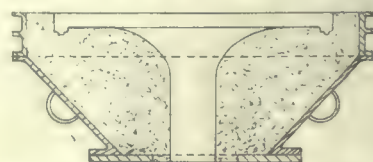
CONICAL SECTION OF FLASK AFTER DRAWING PATTERN.
